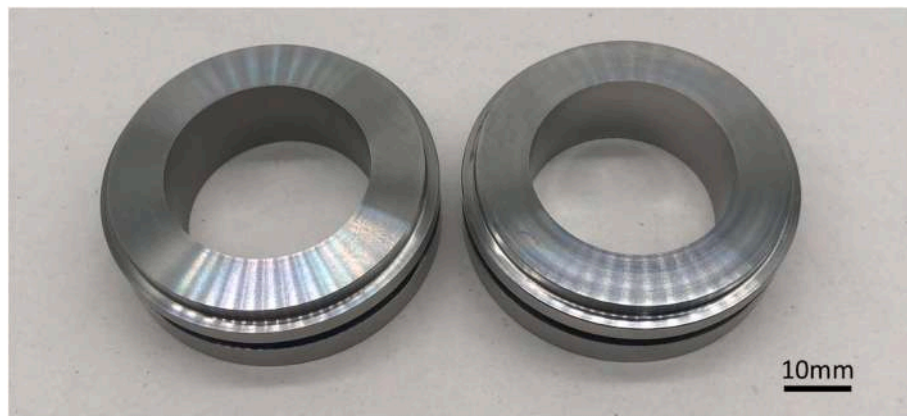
Ni-MMCs mechanical seals after machining produced by NNS-HIPping [128].
